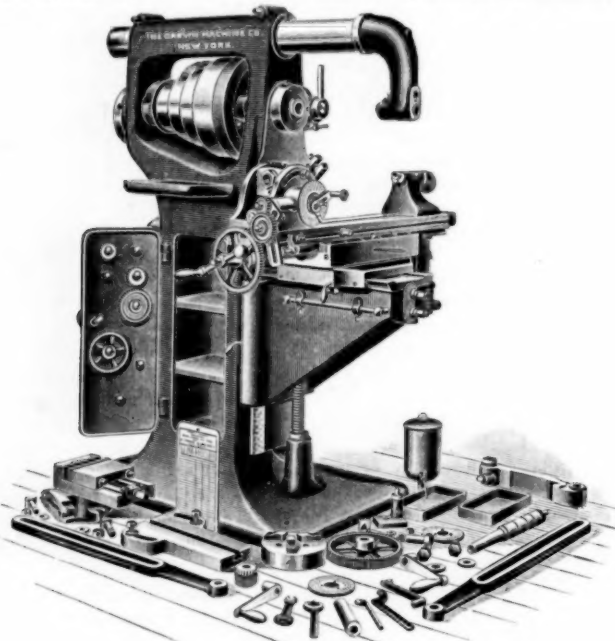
No. 1 UNIVERSAL MILLING MACHINE.
